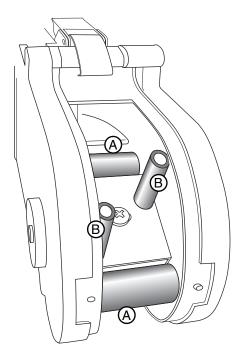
Rollers (A) and guides (B) on the pump rotor
